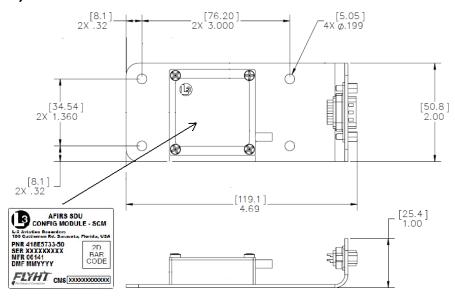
SCM Outline Drawing (dimensions in [millimeters] and inches)
